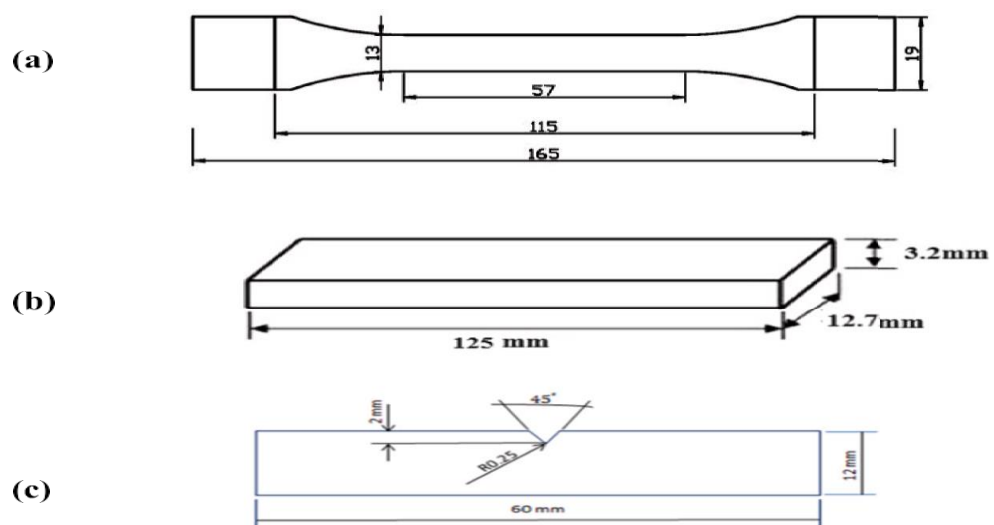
Dimensions image of specimens, (a) tensile test, (b) flexural test, and (c) impact test.
